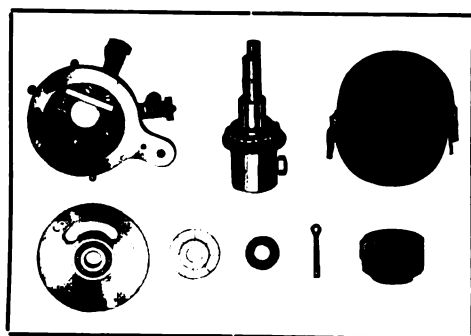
Showing Igniter Used with E and G Systems Completely Disassembled.
